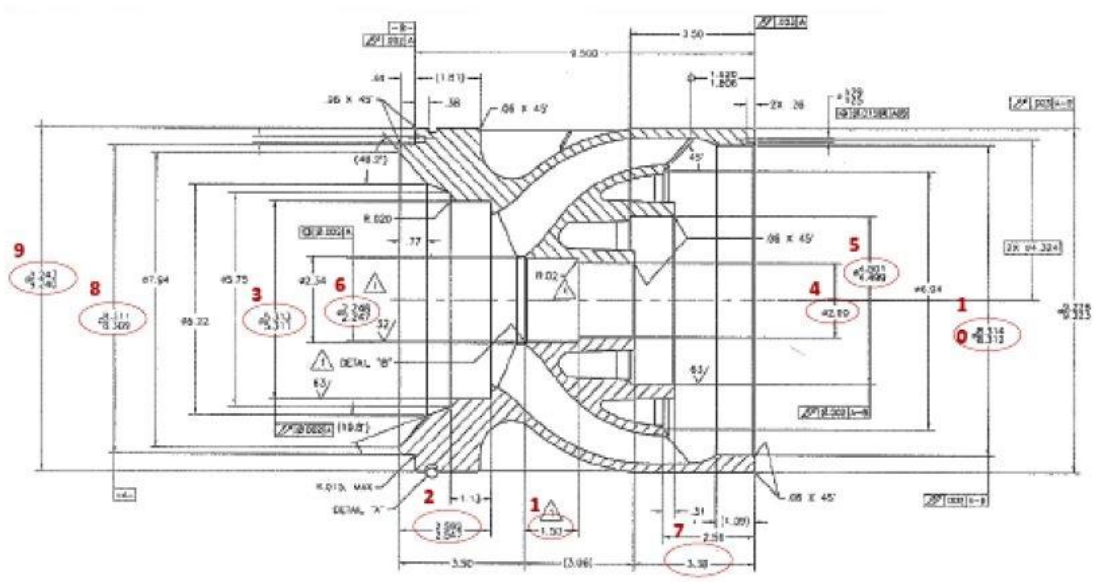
Dimensions of the diffuser of WJE-1000 [15]
